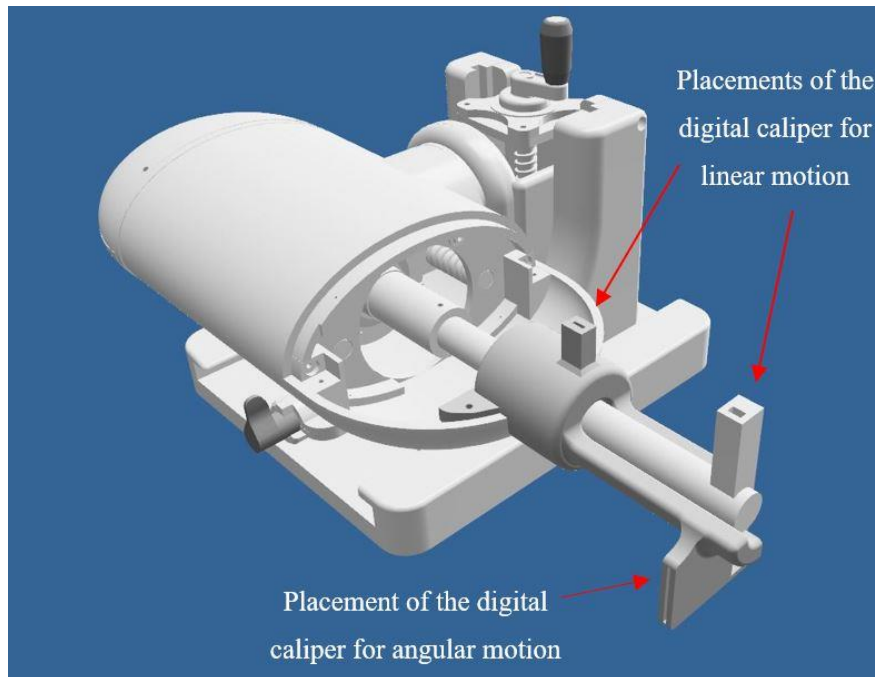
CAD drawing of the robotic device with the removable part (attached to the probe) that was used to evaluate the linear and angular motion of the robotic device.
